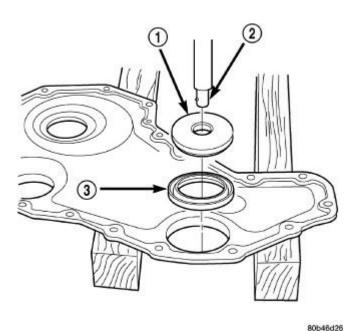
Installing Seal Into Cover With Tool 8281 Courtesy of CHRYSLER GROUP, LLC
